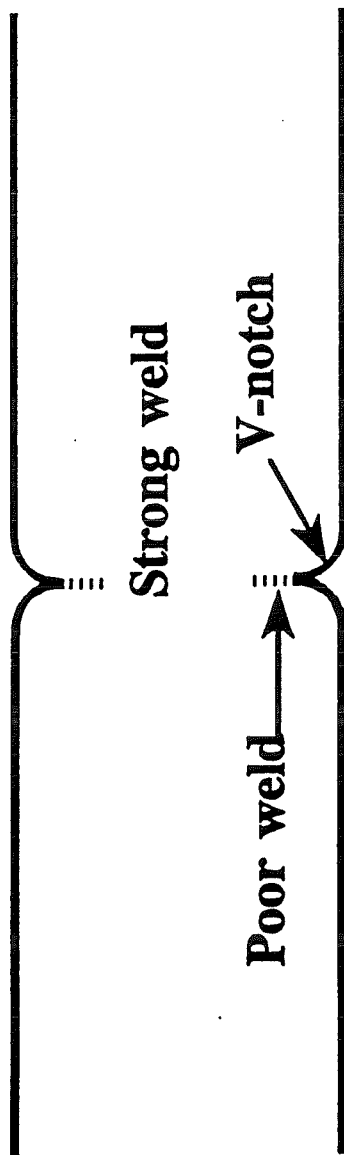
The different zones in a weldline i.e. V-notch, strong weld and poor weld⁵⁴
